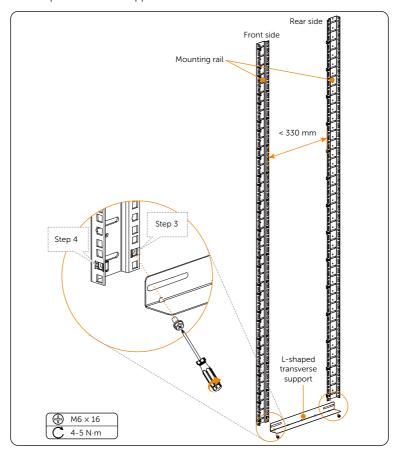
Attaching I-shaped transverse support and tightening M6 screws
